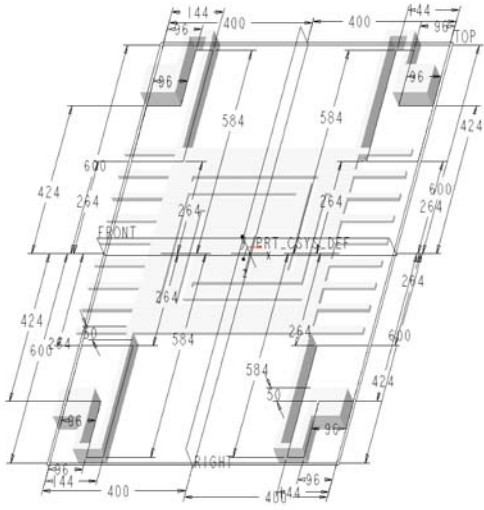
Technical drawing of the gyroscope. All dimensions are in microns.
